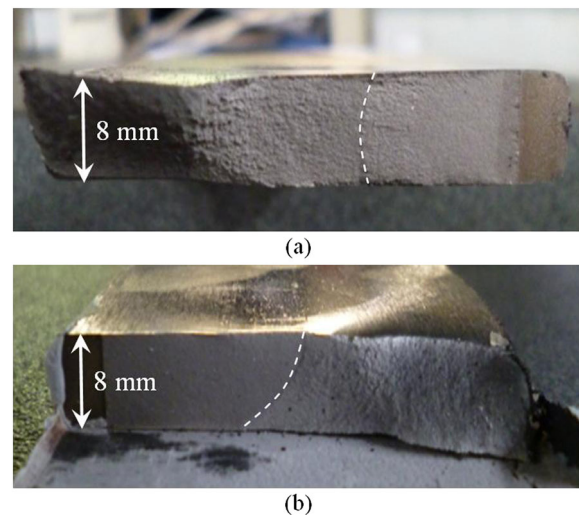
Typical observed specimen failures (specimen A2-D30-2).
